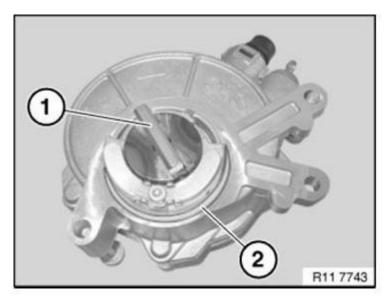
Identifying Drive And Sealing Ring Courtesy of BMW OF NORTH AMERICA, INC.
